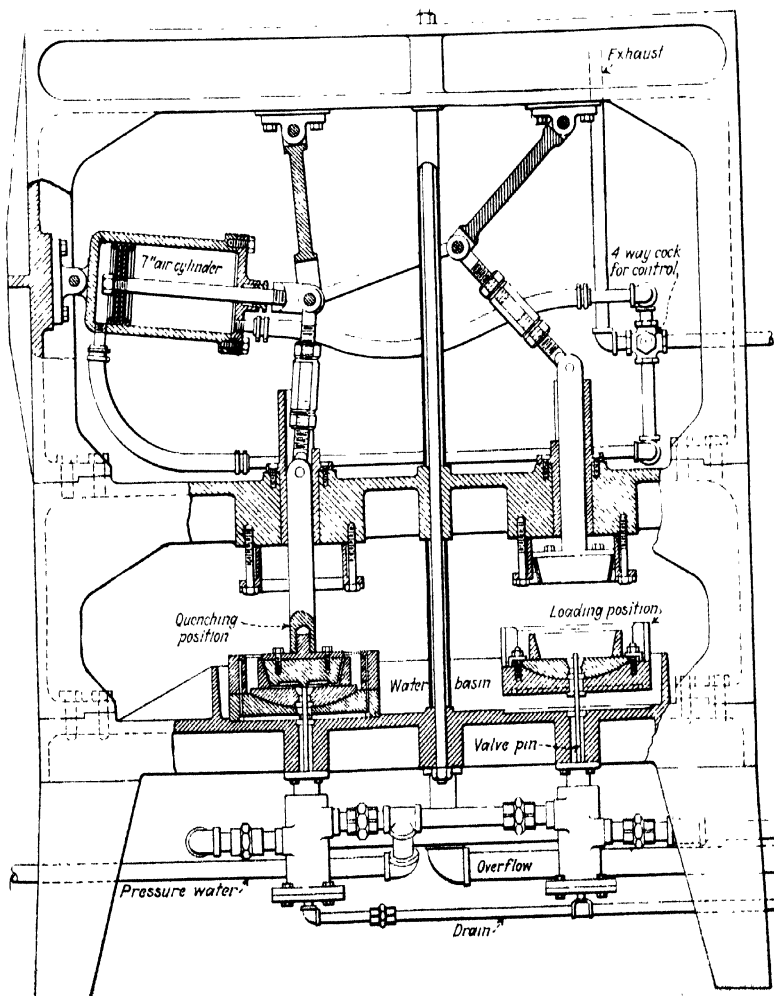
REAR ELEVATION OF QUENCHING MACHINE
